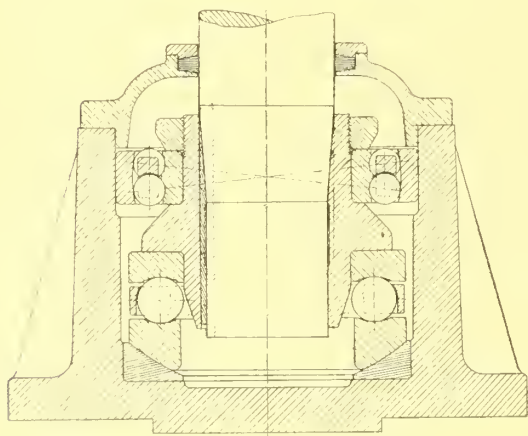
MOUNTING OF BOTTOM RADIAL BEARINGS FOR VERTICAL SHAFT.
